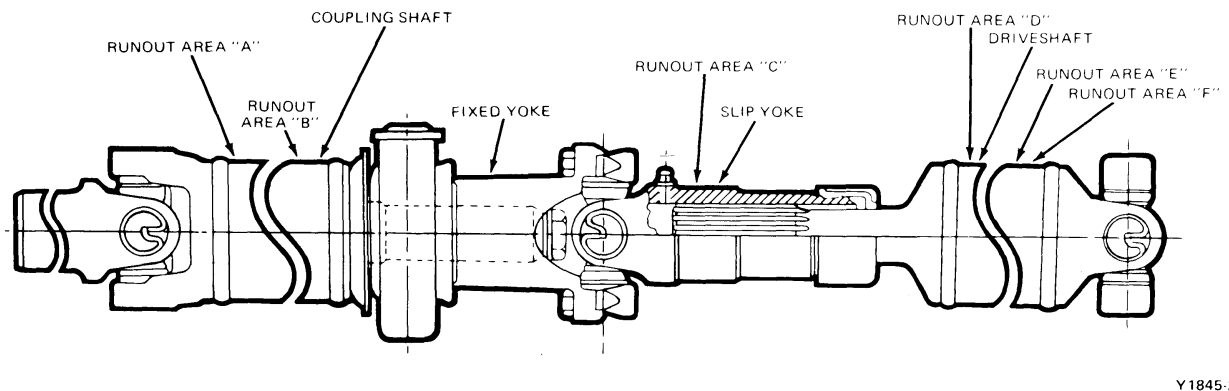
Runout Areas—Two Piece "Fixed Yoke" Driveshaft
